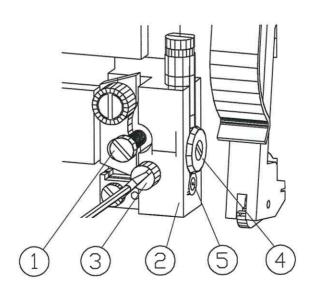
Replacement of hollow blade and adjustment of cut-off clearance
